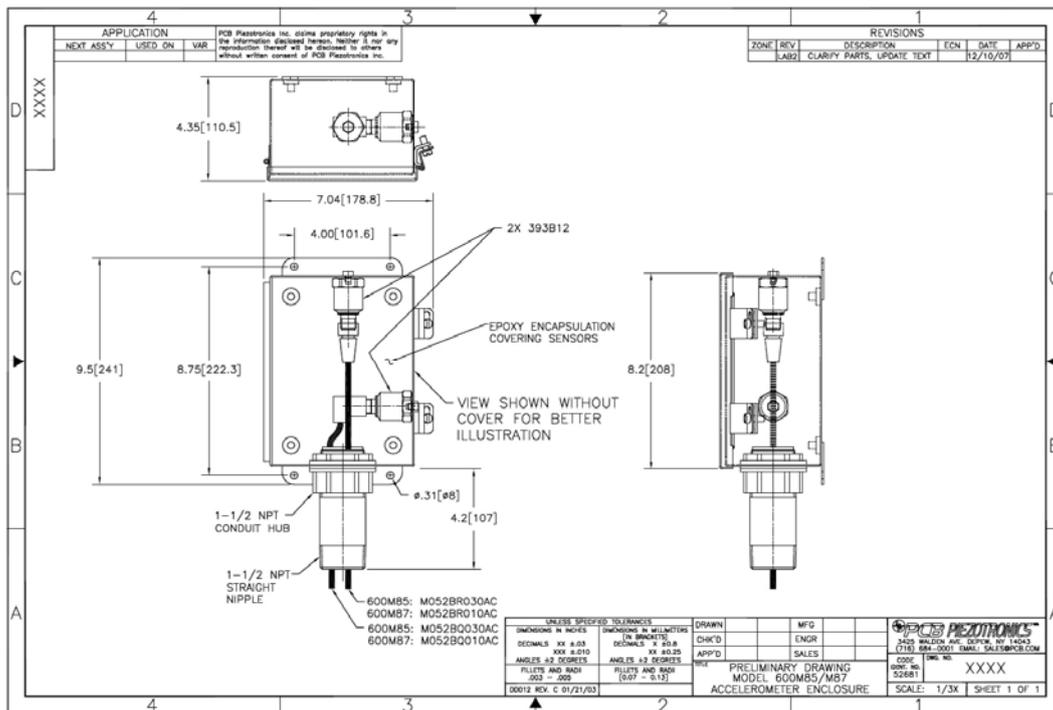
Scheme of developed sensor module (courtesy of PCB Piezotronics Inc.).
